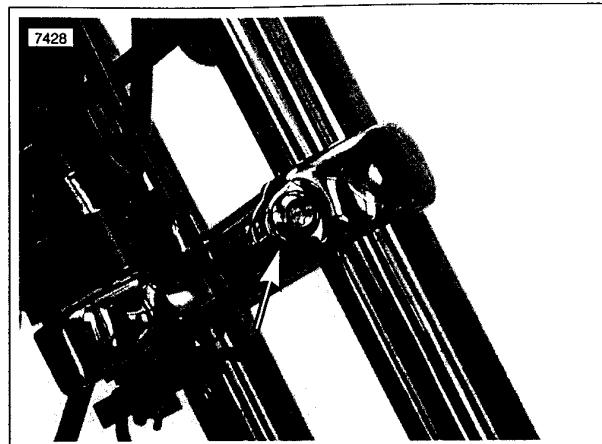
Lower Triple Clamp Pinch Bolt (Typical)
